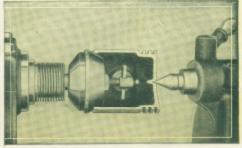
Finishing a Bronze Bushing Held on a Mandrel.
